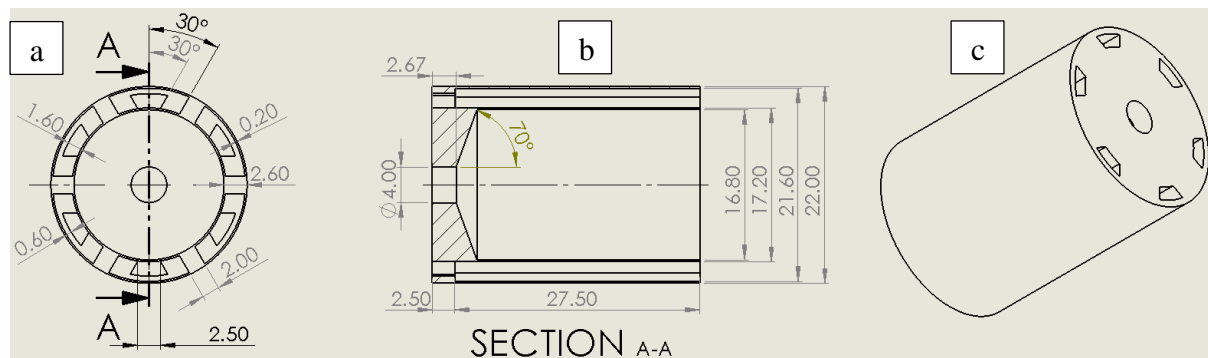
Views of vascular cellular system, from left to right: a) top view b) cross-sectional view c) isometric view, respectively.
